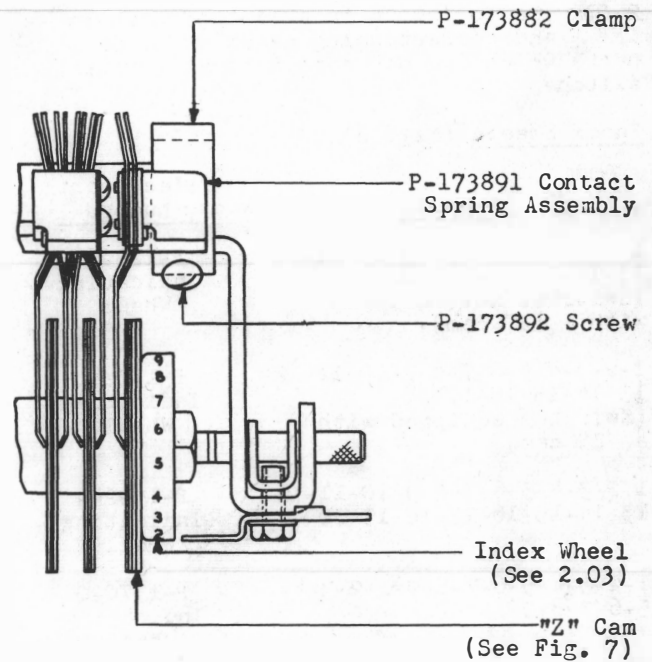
"Z" Cam Spring Assembly and Mounting Clamp
